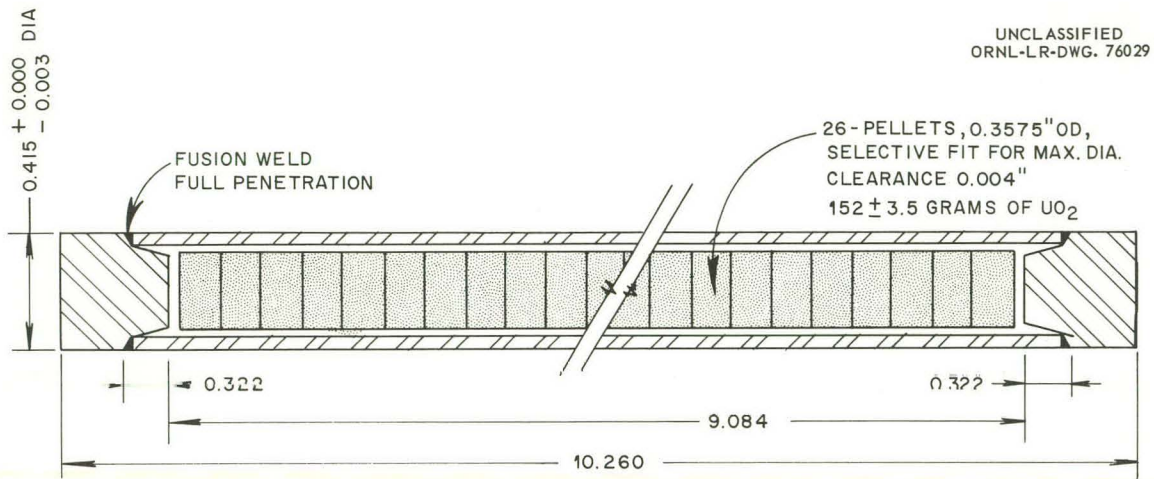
PWR Core 1-blanket fuel rod assembly. (Zircaloy-2 clad, natural enrichment UO₂ pellets.)
